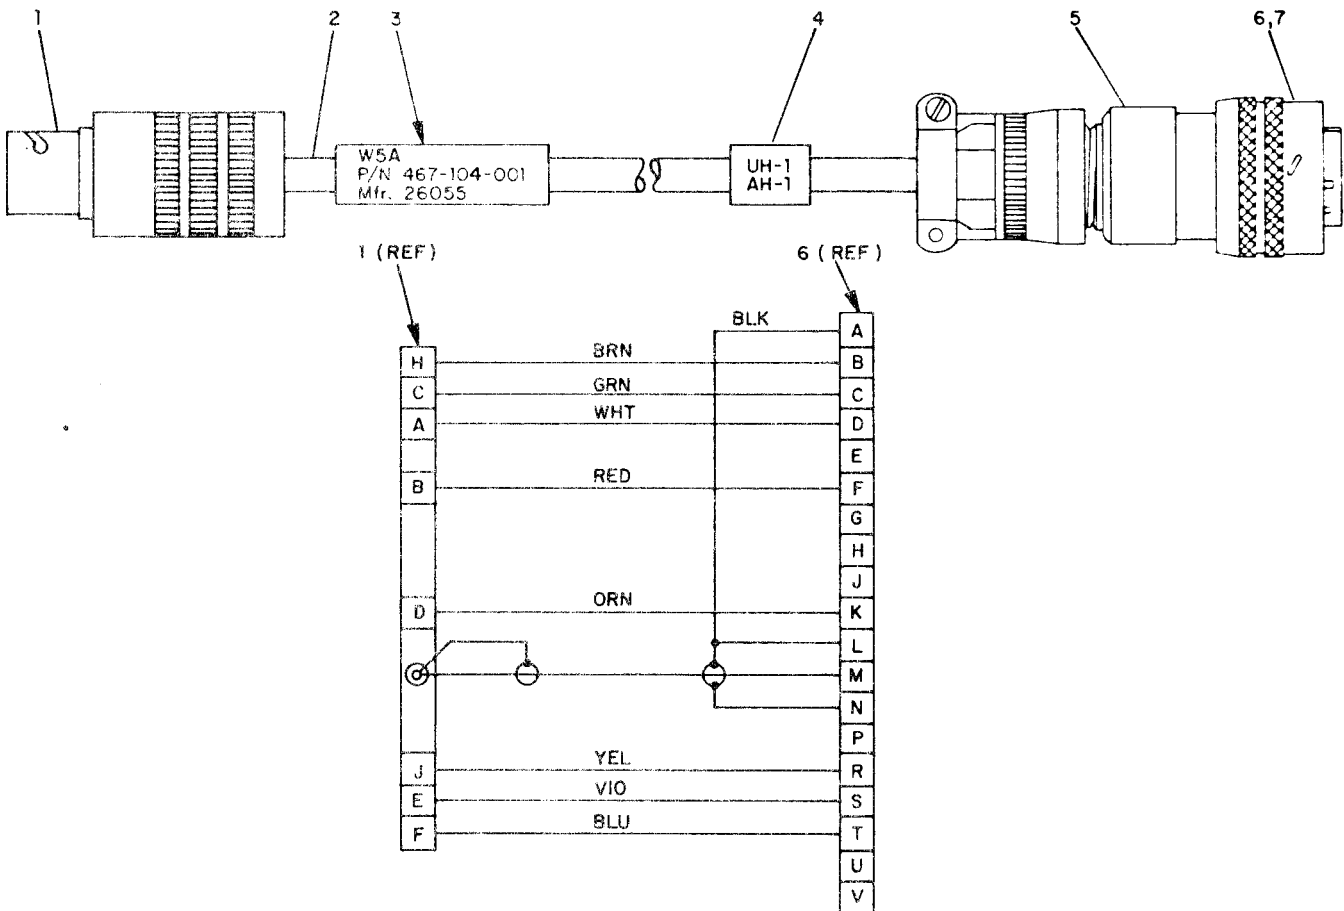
Adapter cable assembly W5A, part number 467-104-001
